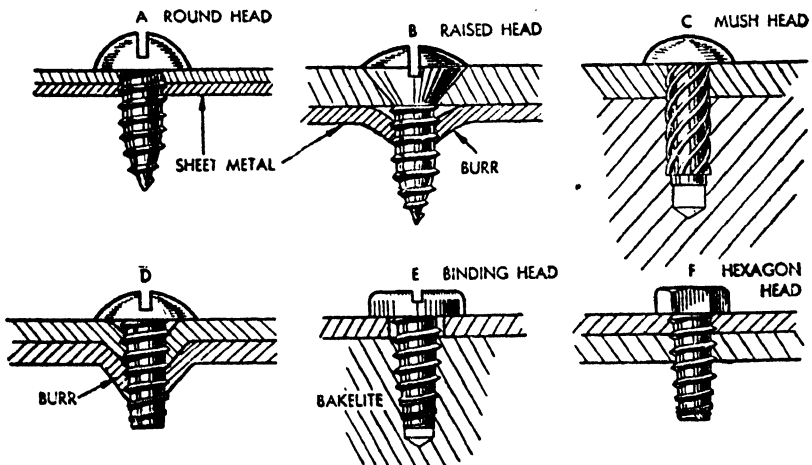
Self-tapping screws for fixing sheet metal to metal and bakelite. A and B. Jointing sheet metal and making fastenings to sheet metal up to 18 gauge; C. hammer-drive hardened screw for jointing sheet metal to casting. The pilot holes are punched or drilled; D, E and F. screw drive self tapping.
